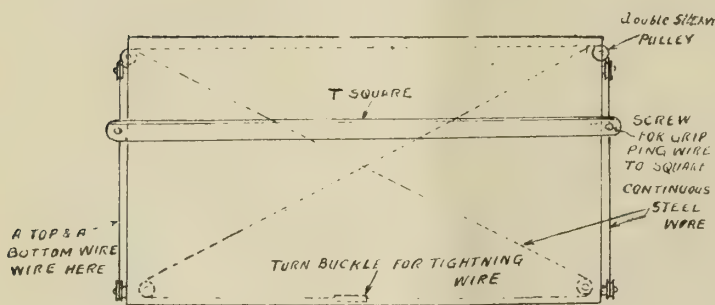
<sup>A</sup> DRAWING BOARD WITH WIRE PARALLEL
